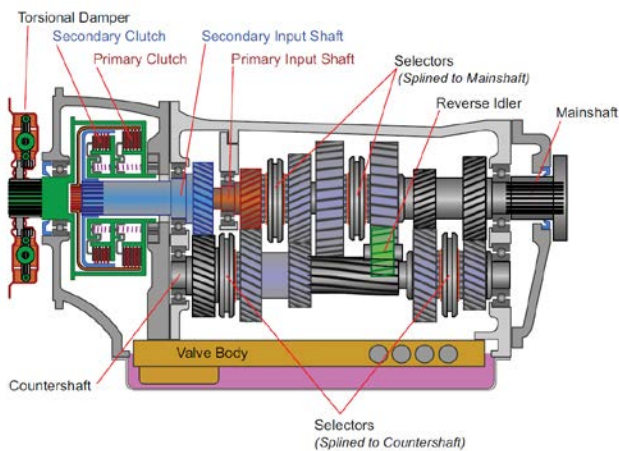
Double clutch transmission with synchro mesh on the main shaft and intermediate shaft [3]
